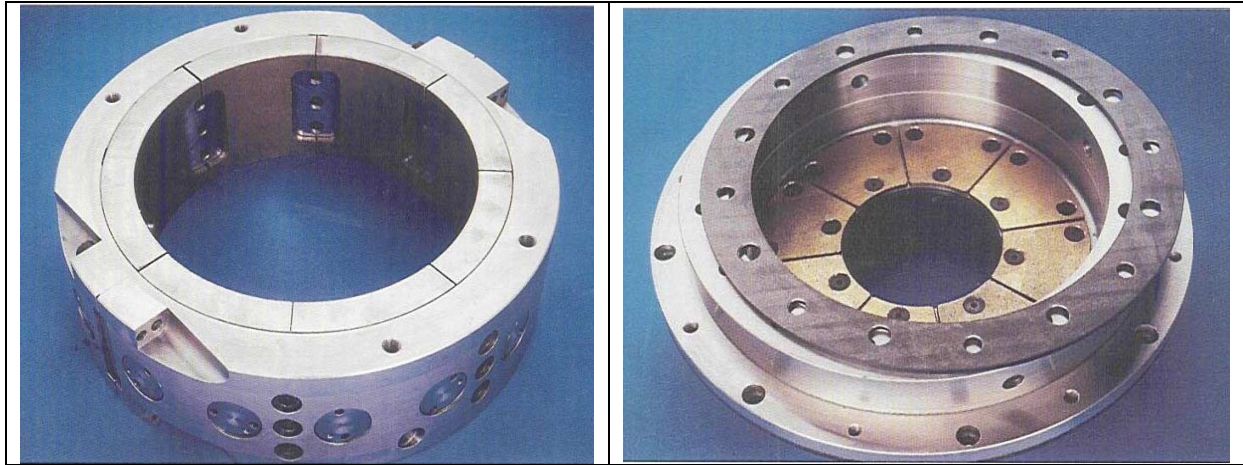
NAM Radial Auxiliary Bearing [5] Figure 2 NAM Axial Auxiliary Bearing [5].
